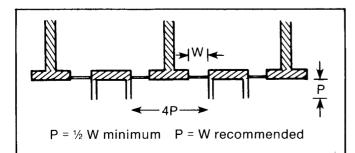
Recommended Wing Wall Dimensions and Separations
